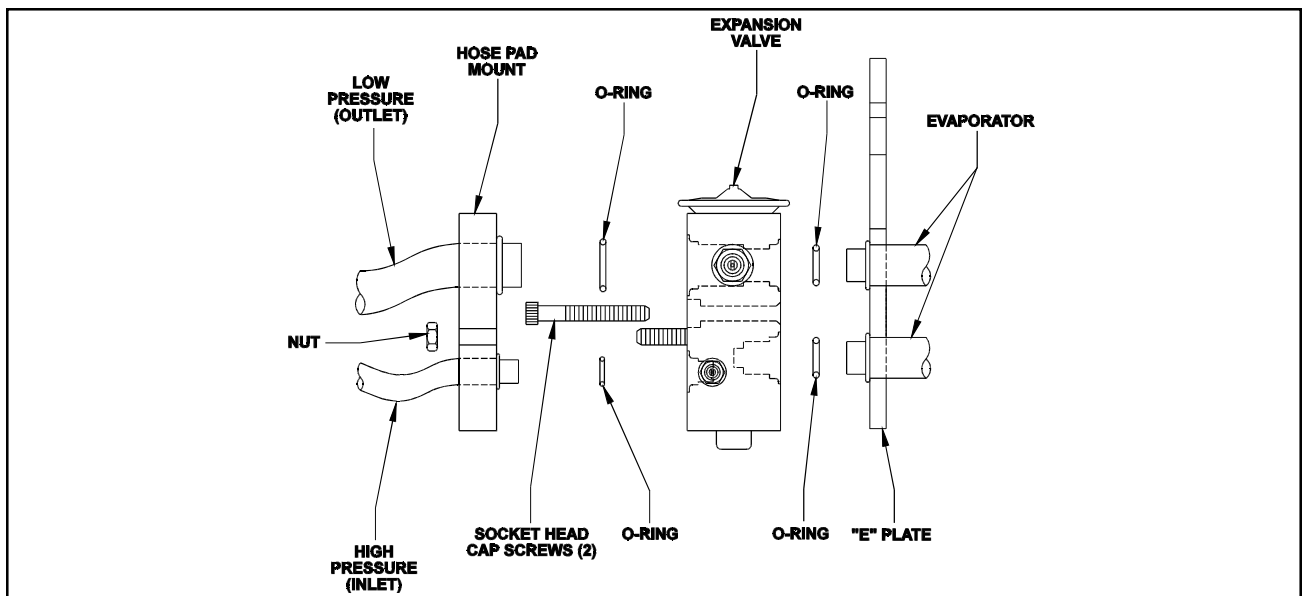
Pad Fitting Assembly (Cab Unit)
